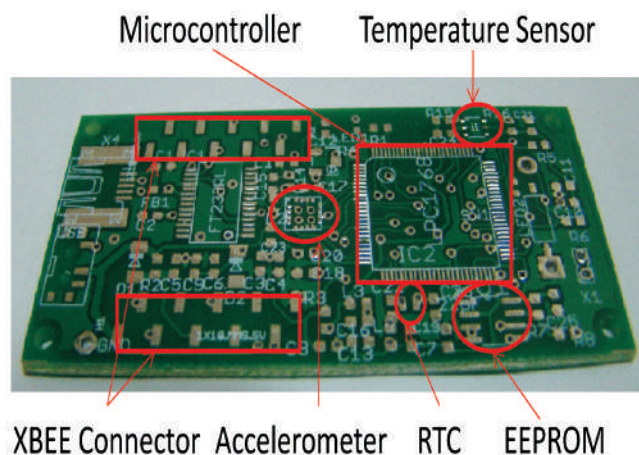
2 layer printed circuit board (6.2cm X 3cm)
